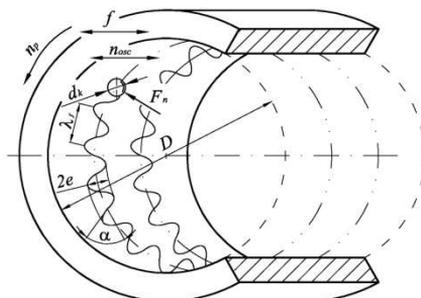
Kinematics of the oscillatory burnishing of the holes through burnishing [5-7]
